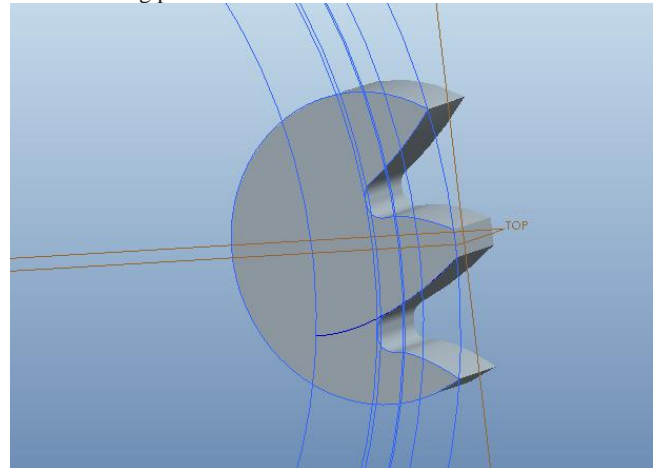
3-dimensional model of an asymmetric gear tooth.
